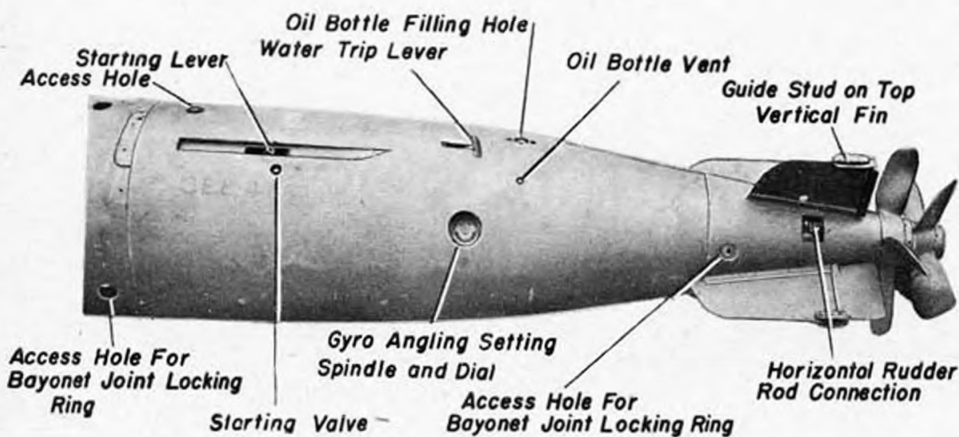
Torpedo Type 89 Mod 1, Afterbody, Portside
